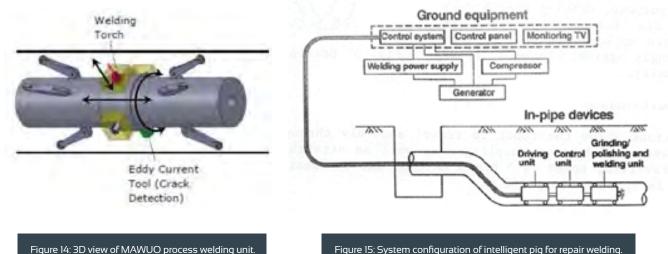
System configuration of intelligent pig for repair welding.
